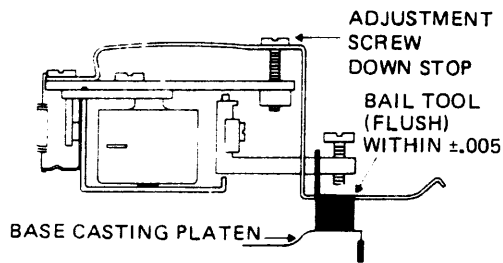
HEAD LOAD ACTUATOR DOWNSTOP ADJUSTMENT
